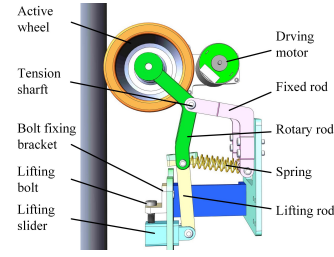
The 3D model of the suspension mechanism and lifting mechanism
